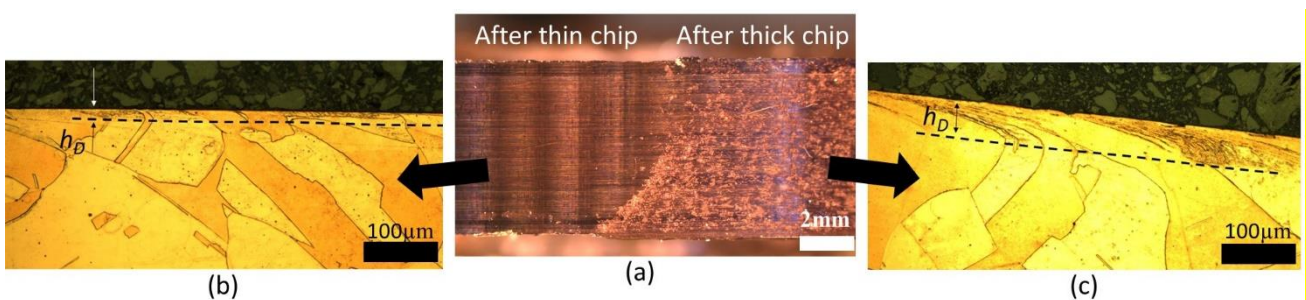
Cut surface plan and section views. (a) A plan macro view showing the changed surface when chip formation changes from thick to thin. (b) The cut surface section below a thin chip. (c) The cut surface section below a thick chip. The cut material is CW008A as received, $\gamma = 19^\circ$ and $v_c = 5\text{m/min}$.
